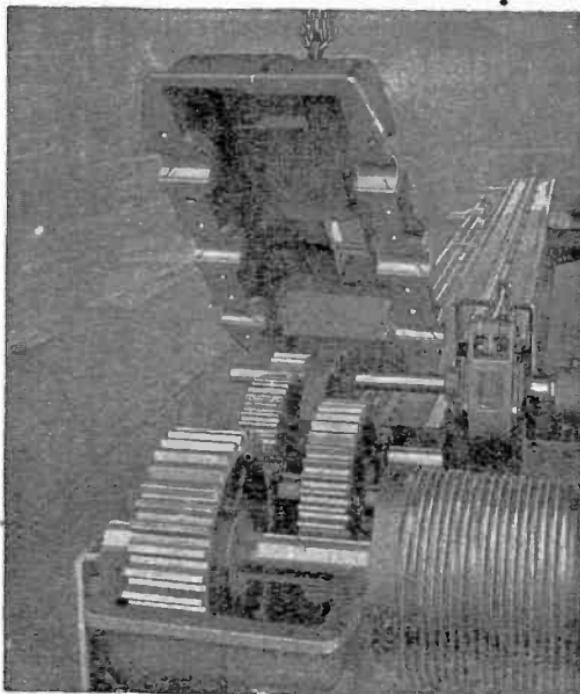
,878.—*Euclid crane construction 5.* Hoisting gear train. Wide face coarse pitch gears are used. The illustration also shows the shoe type electric brake mounted on the motor shaft and the Weston type mechanical load brake on the intermediate shaft.
